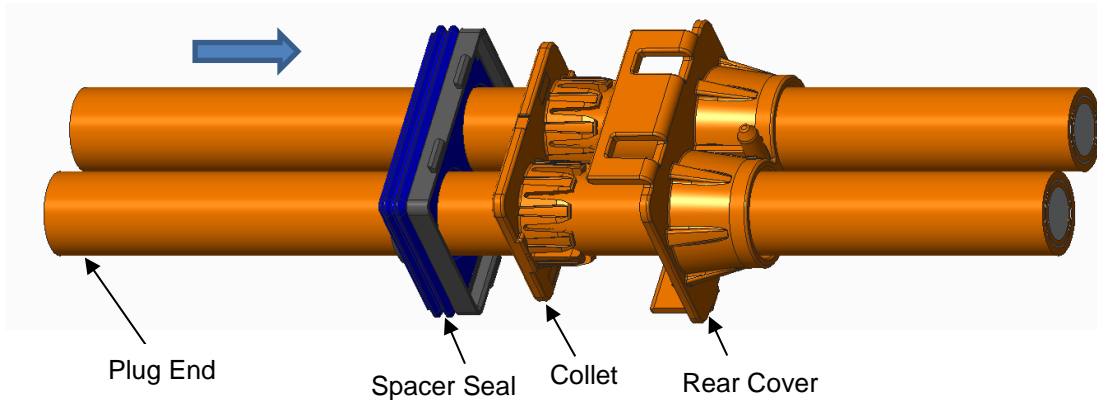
Rear cover, collet, and spacer seal loaded on cable
